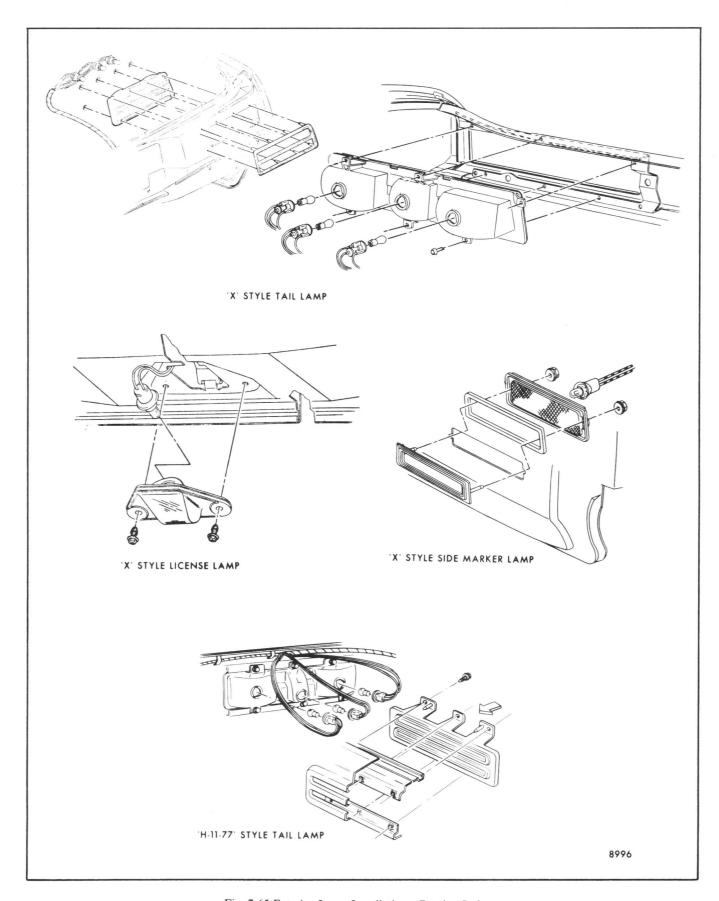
Exterior Lamp Installation - Pontiac Styles
